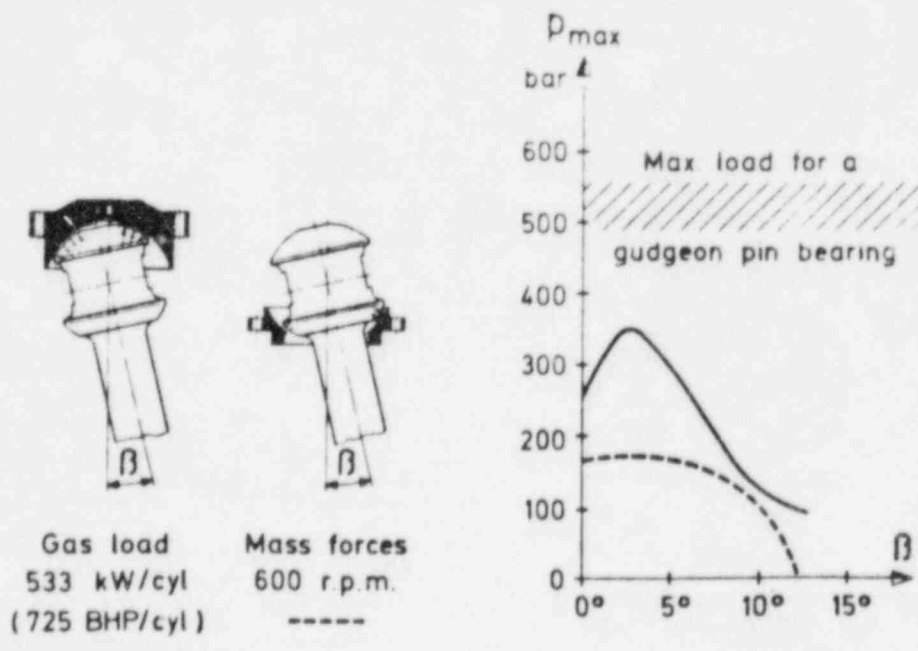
Specific load of the spherical bearing of the 240/48 engine.
